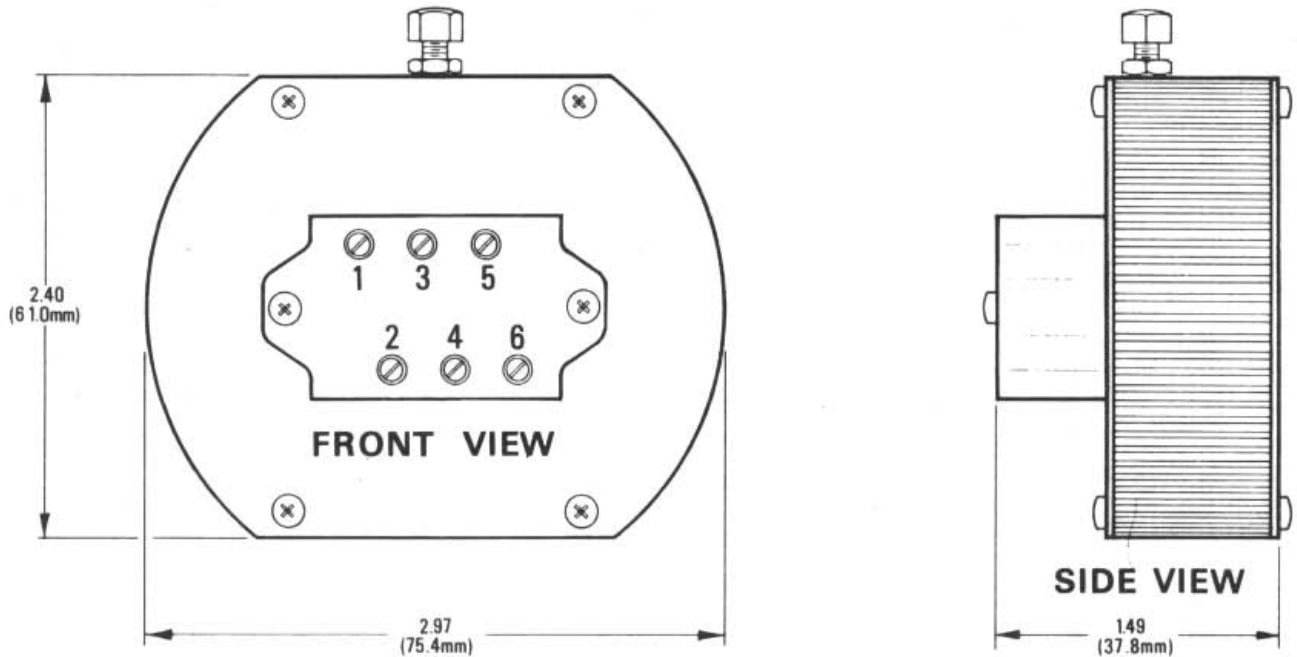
Standard Unit and Unit, Outline and Dimension
